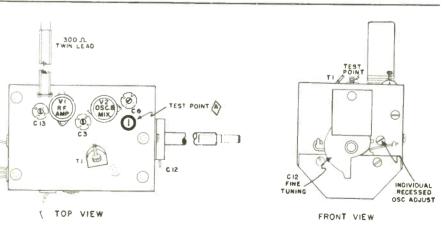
R.F. TUNER ADJUSTMENT POINTS (STANDARD COIL CASCODE TUNER)
